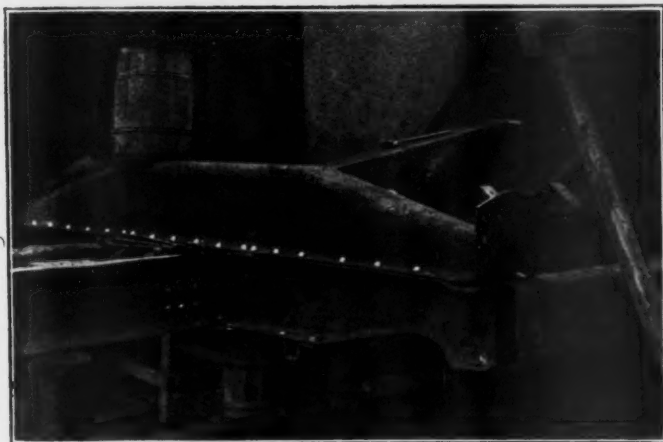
HOPPER CAR SIDE SILL BROKEN AT THE BOLSTER.
